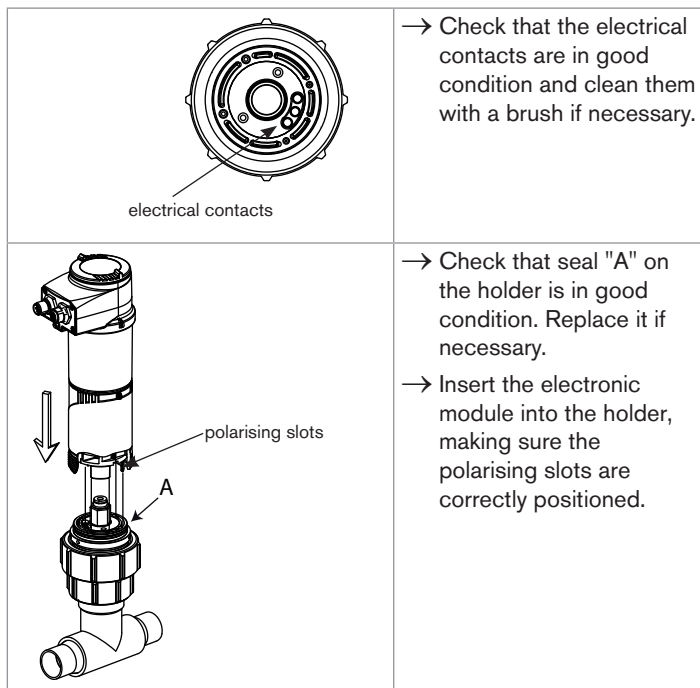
Mounting the electronic module to the sensor holder, after installation of the holder on a fitting (8202)
